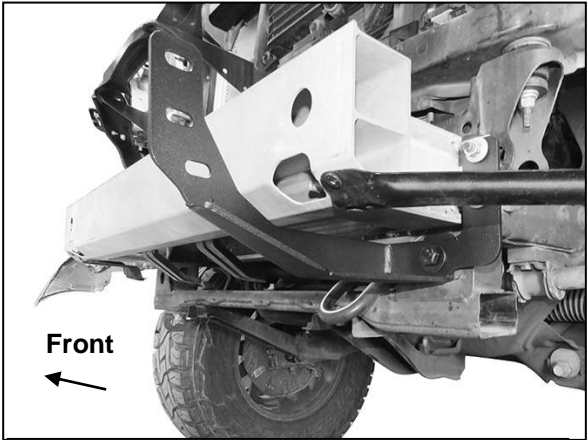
Reuse the (2) factory hex nuts to attach driver/left Frame Mounting Bracket to the inner impact bumper bracket
